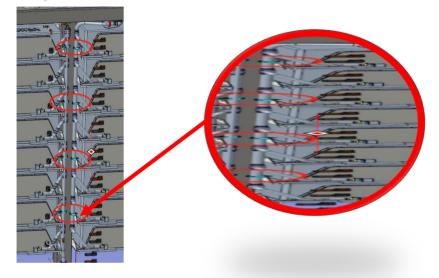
Fix each secondary outlet pipeline to inner hole of sheet metal part
